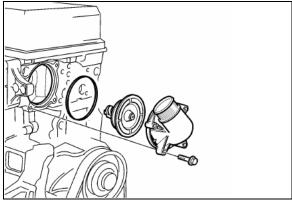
THERMOSTAT HOUSING (DDC S60 ENGINE)
